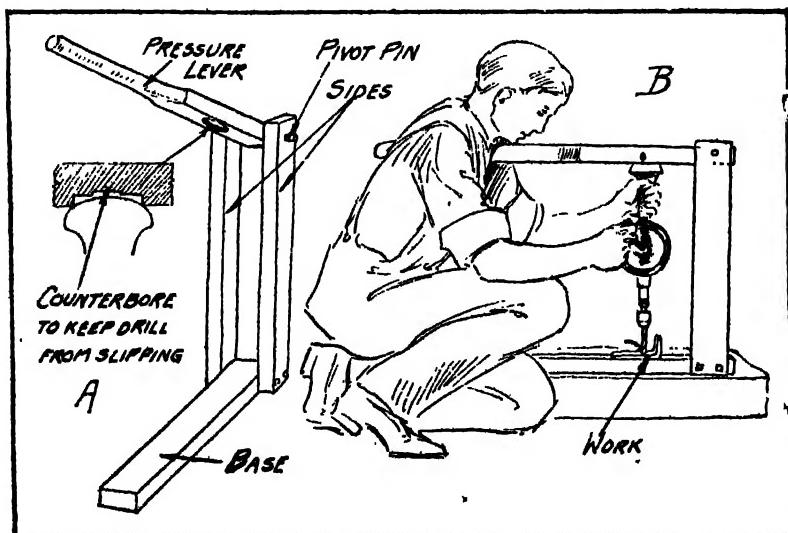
How to Use Hand Drills in Simple Homemade Drill Press.
